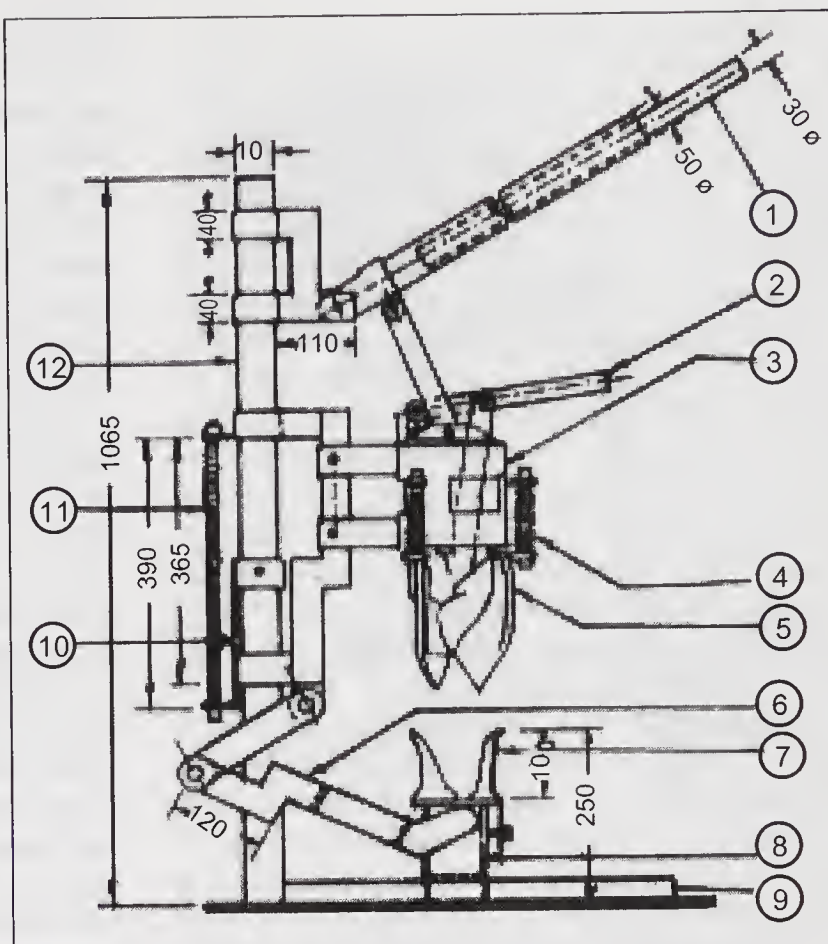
Coconut dehusking machine manually operated. 1, Telescopic lever; 2, Lever with connecting rod; 3, Tool holder; 4, Blade spring; 5, Blade; 6, Platform blade; 7, Lever mechanism; 8, Base blades; 9, Platform; 10, Frame; 11, Return spring; 12, Vertical shaft.
